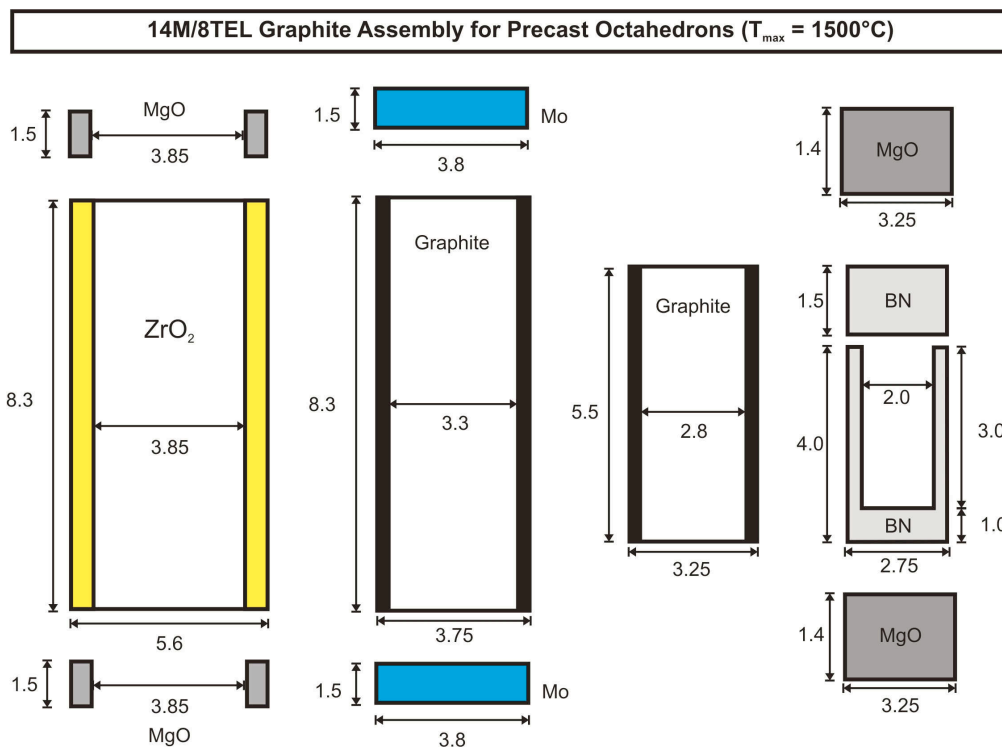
Dimensions/mm of the pieces used for an 14/8 assembly (precast MgO-octahedron, pyrophyllite gaskets).
